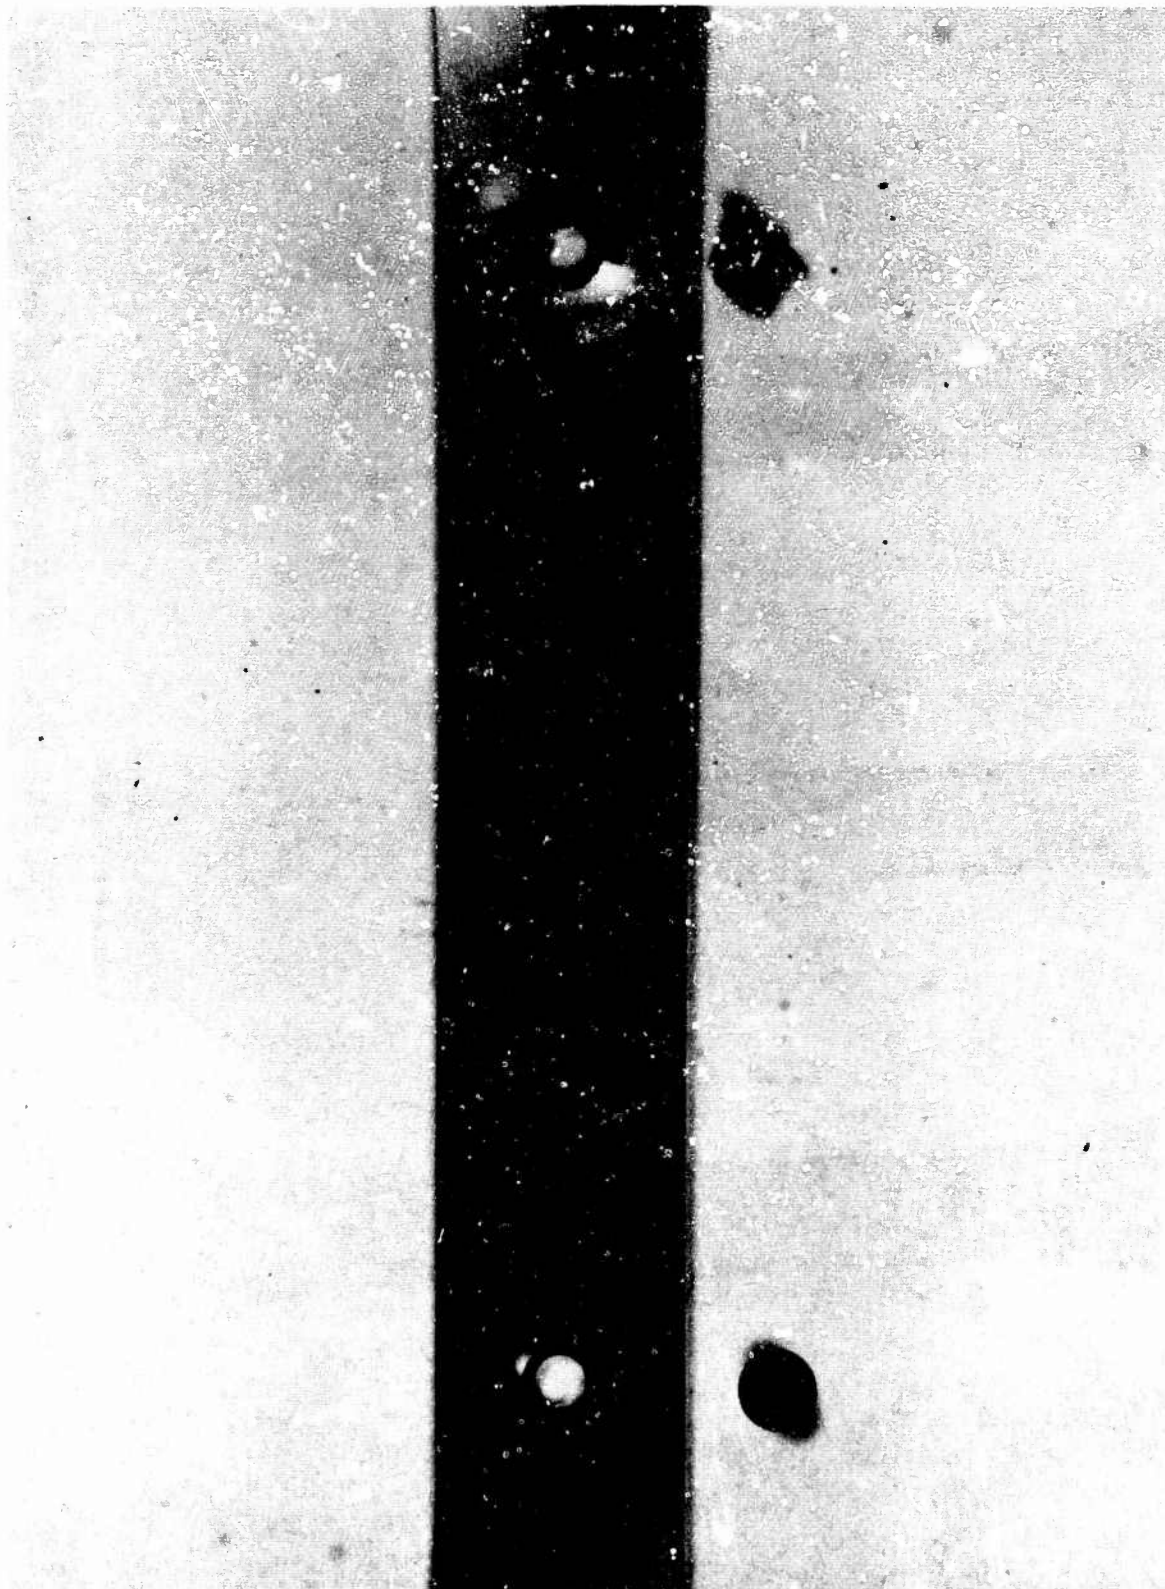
Typical Countersunk Threaded Bushing, Specimen 17.
